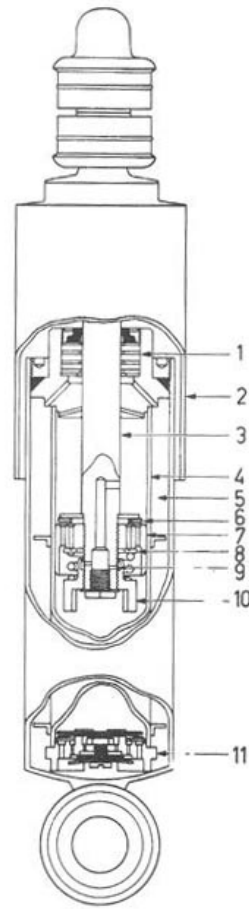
A double tube damper showing the following features - 1 seal; 2 shroud; 3 rod; 4 inner cylinder; 5 annular foot and gas chambers; 6 piston compression valve; 7 piston; 8 extension valve; 9 parallel hole feed; 10 adjuster; 11 foot valve. [3]
